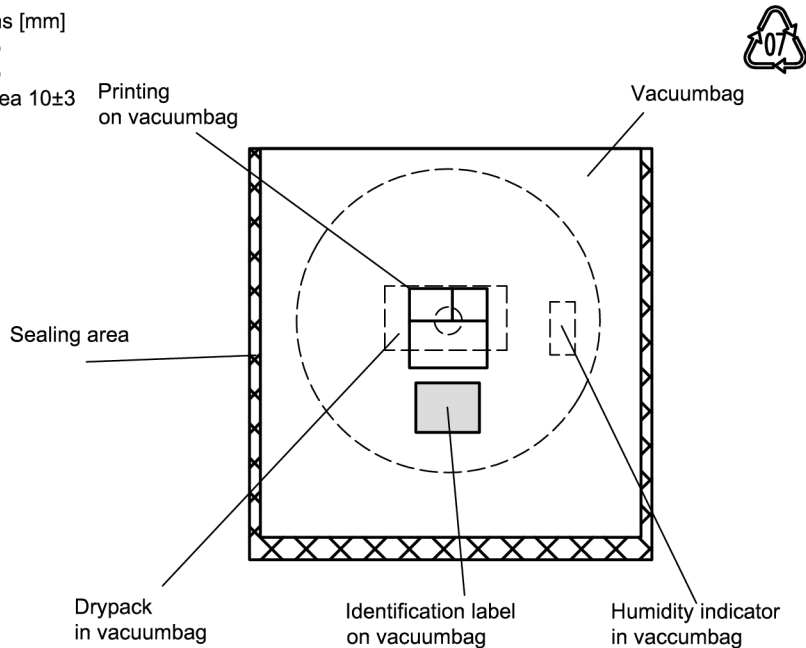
Drawing of moisture barrier bag (MBB) for reel with diameter of 180 mm.
